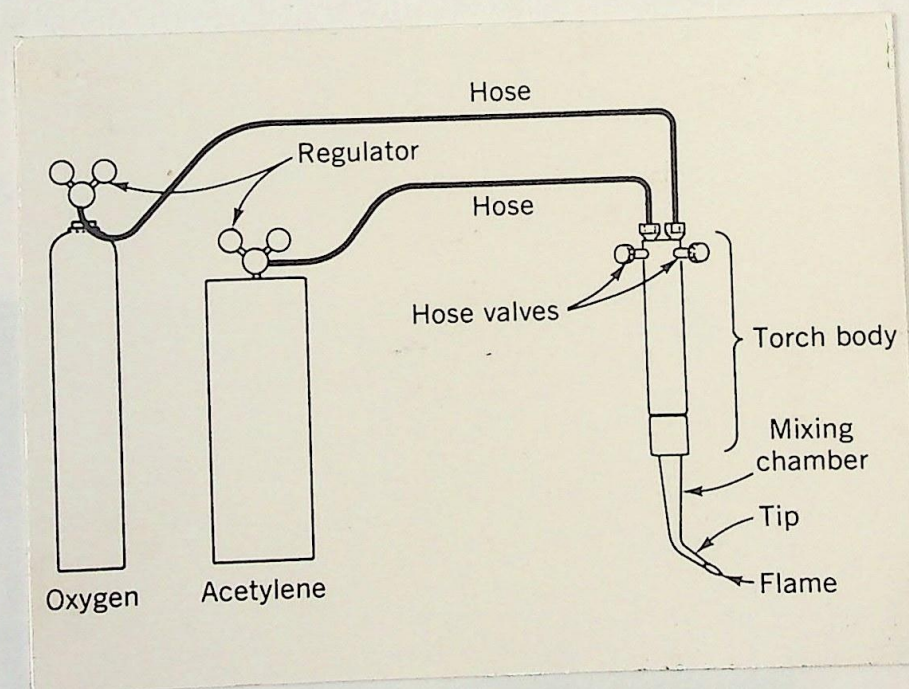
Schematic drawing of oxyacetylene welding equipment.
